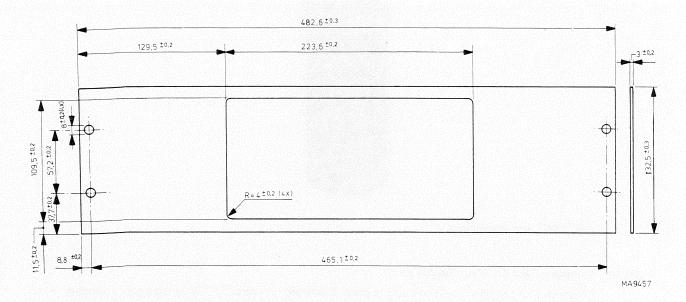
Dimensioned sketch for 19" Rackmount PM 3225 Masszeichnung für 19" Gestelleinbau für PM 3225 Croquis coté pour montage en rack 19" du PM 3225
